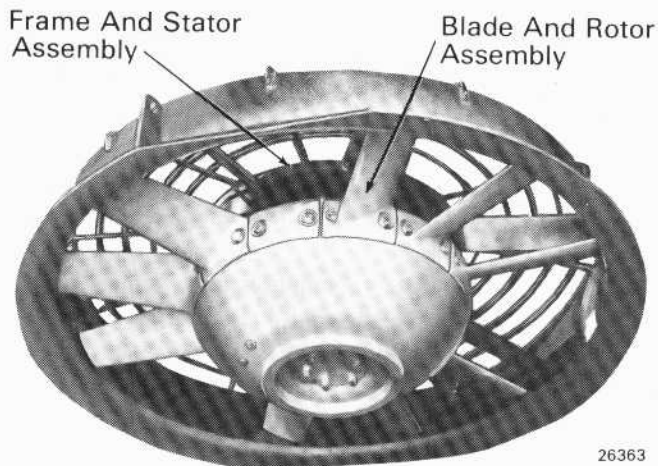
Nine-Blade "Q" Cooling Fan Assembly
